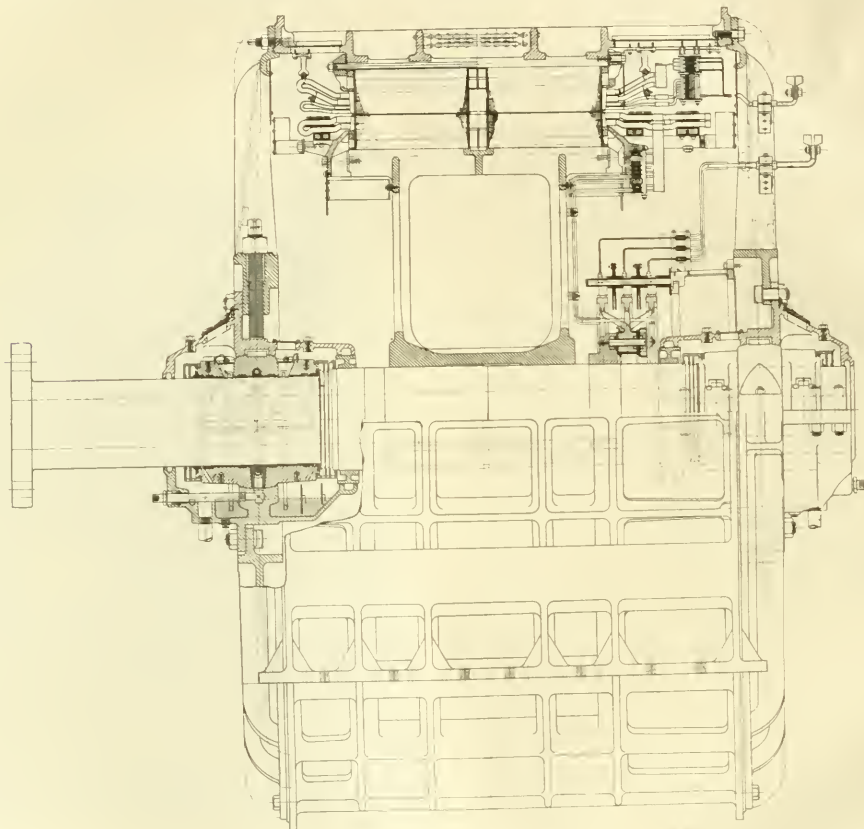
GENERAL ASSEMBLY OF PROPELLING MOTORS
